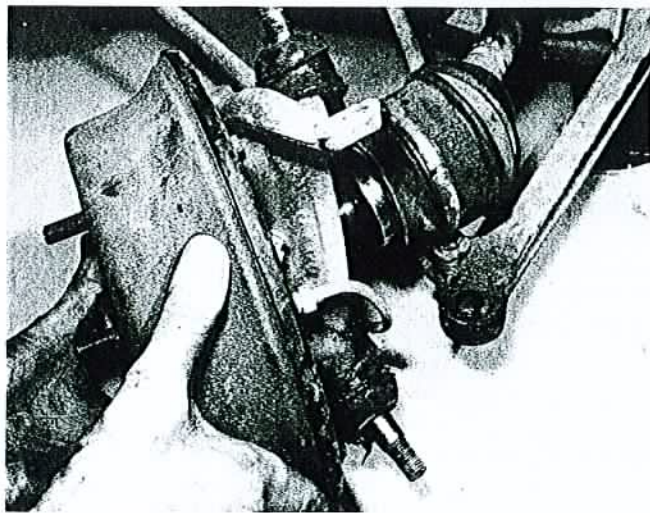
Removal of driveshaft inner end from offset sphere joint (Sec 3)
